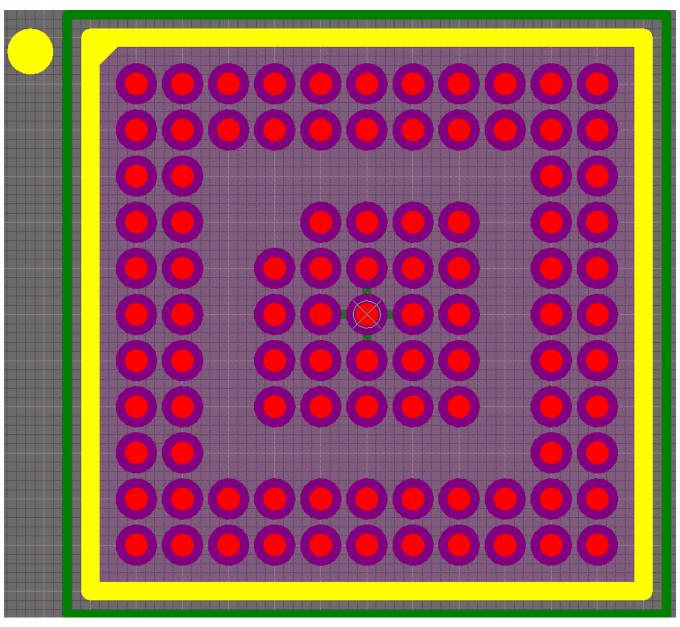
Top View Standard TPS65986 Footprint (Circular Pads)
